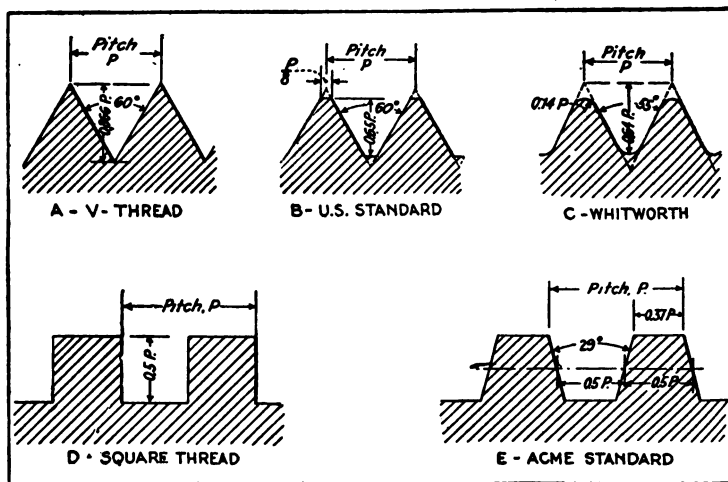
SECTIONS OF STANDARD SCREW THREADS
